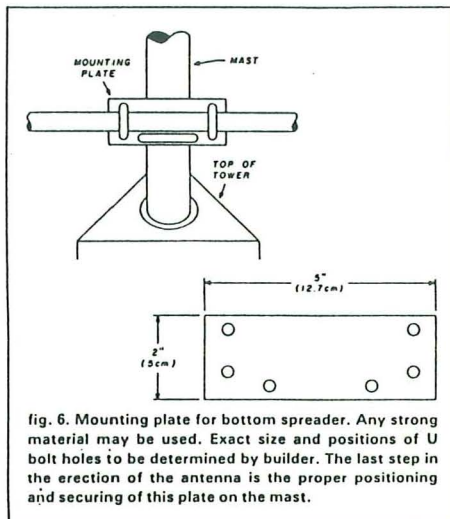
Mounting plate for bottom spreader. Any strong material may be used. Exact size and positions of U bolt holes to be determined by builder. The last step in the erection of the antenna is the proper positioning and securing of this plate on the mast.
